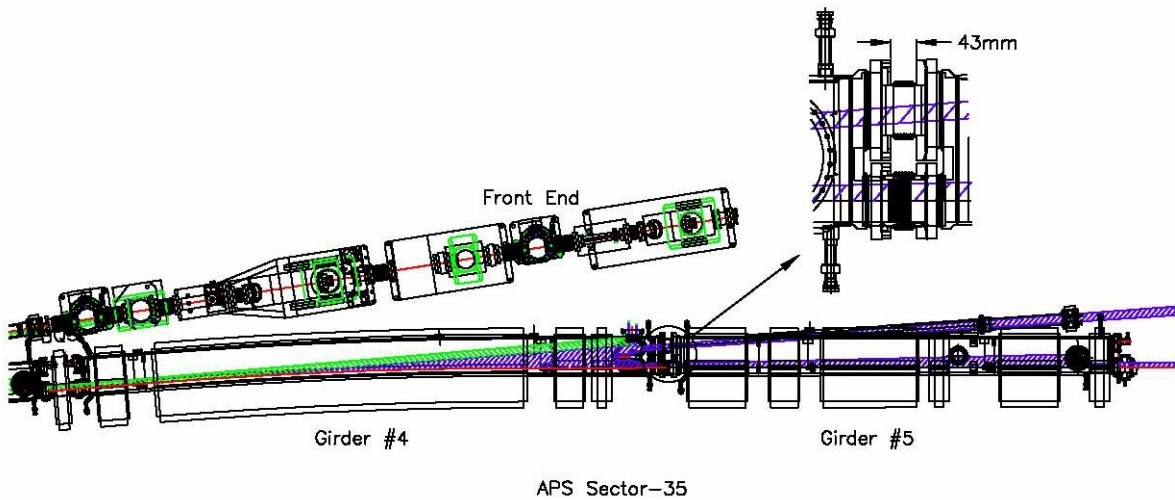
Plan view of girders 4 and 5 of the APS Sector 35.
